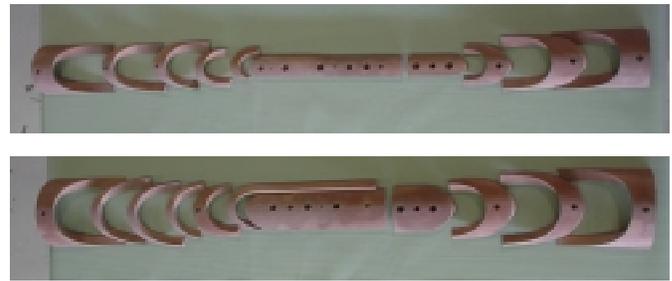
Photographs of the inner and outer layer coil end parts fabricated using the selective laser sintering technology.
